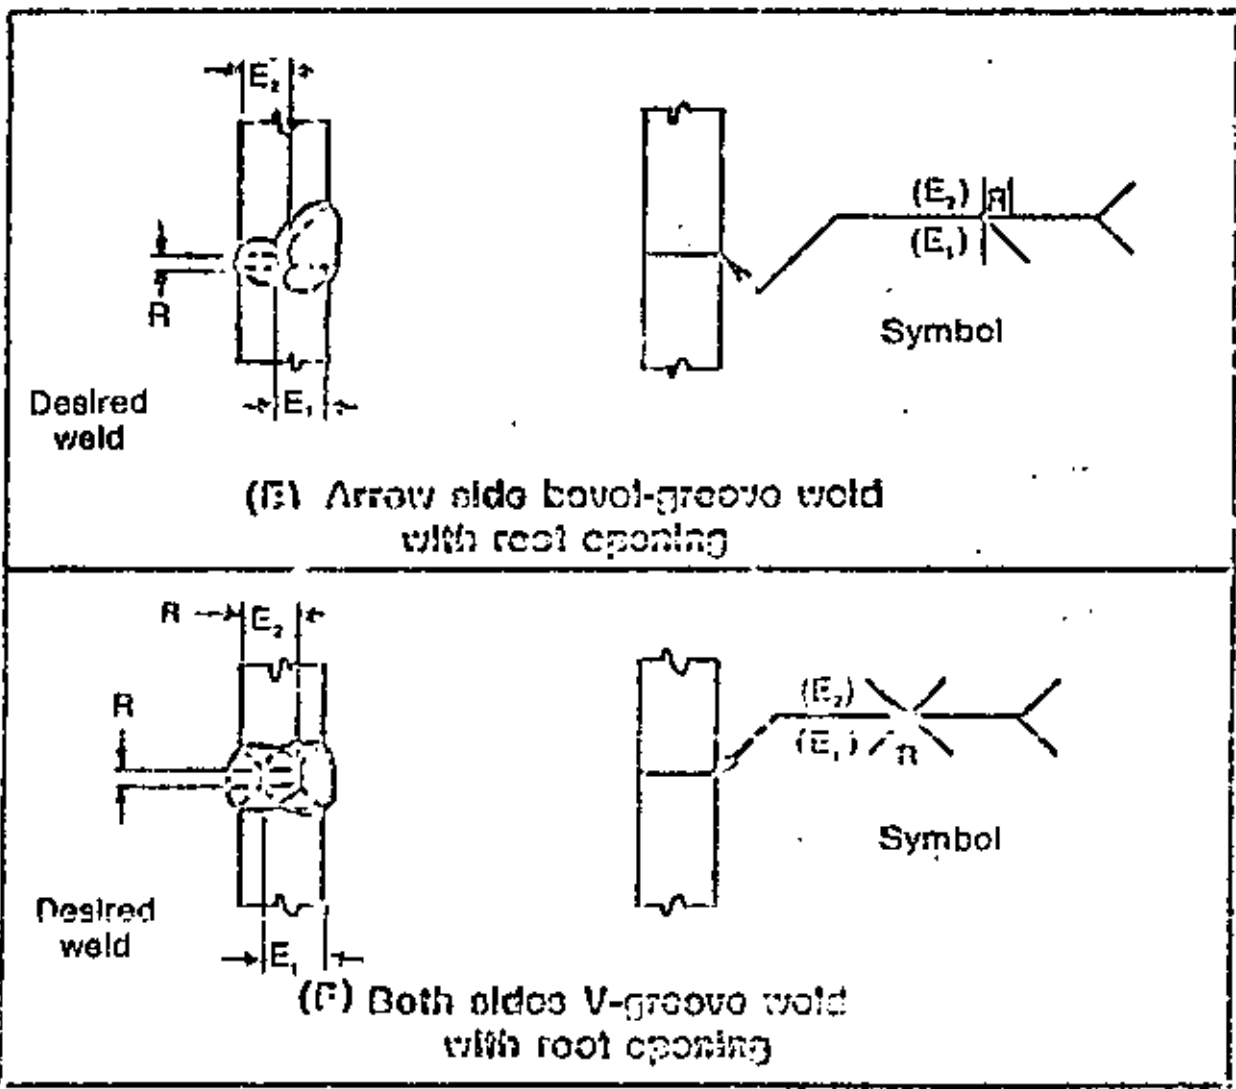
(cont.)—Designation of effective throat of groove welds with specified joint preparation.
